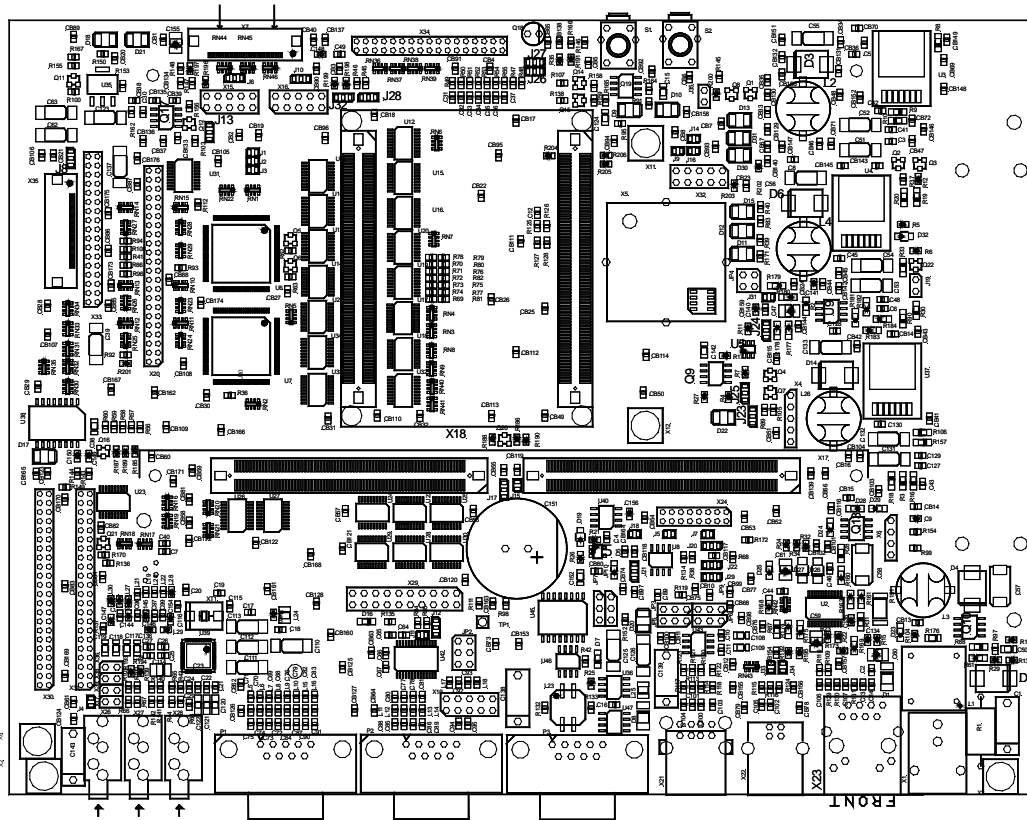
Component Placement Diagram Carrier Board (PCB Revision 1220.3)
